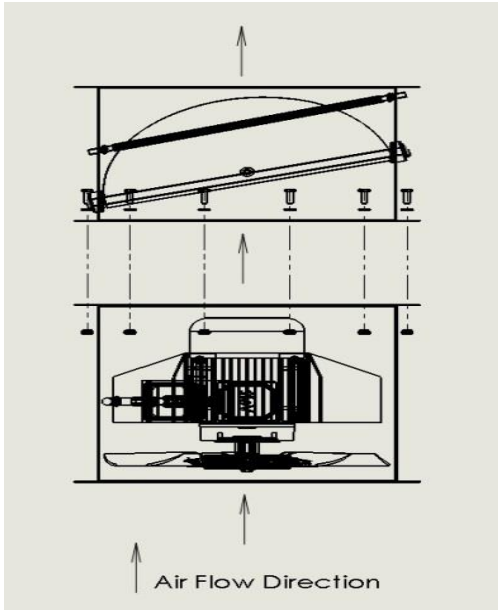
illustrates the MFT, MSC, NRD/XS and MFL accessories that could be used with the fan.
